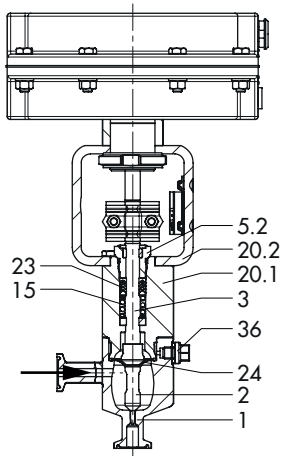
Type 3349 Micro-flow Valve with Type 3271 Pneumatic Actuator
